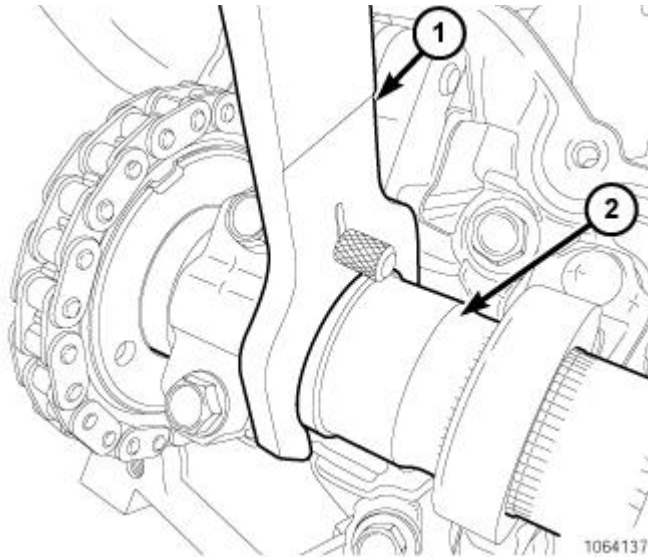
Removing/Installing Camshaft Sprocket Bolt Using Spanner Wrench
